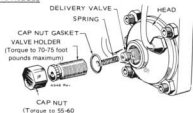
DELIVERY VALVE ASSEMBLY
